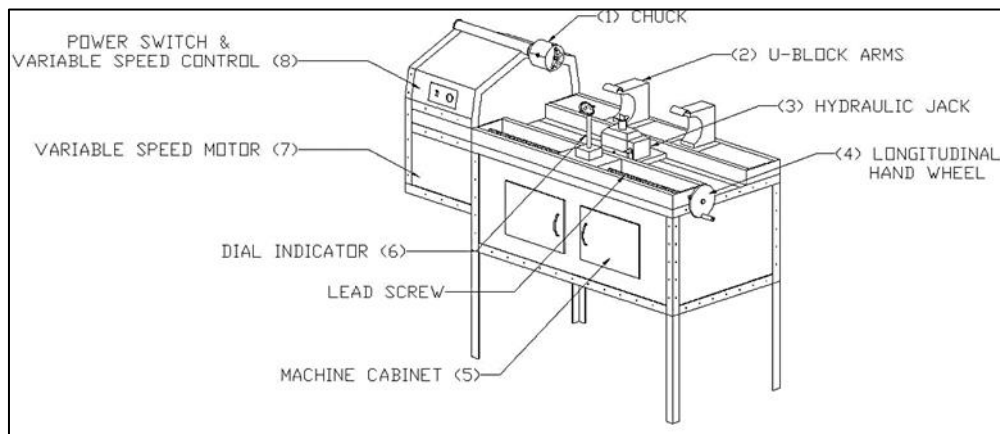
Innovative Telescopic Fixed Fork Presser Machine
